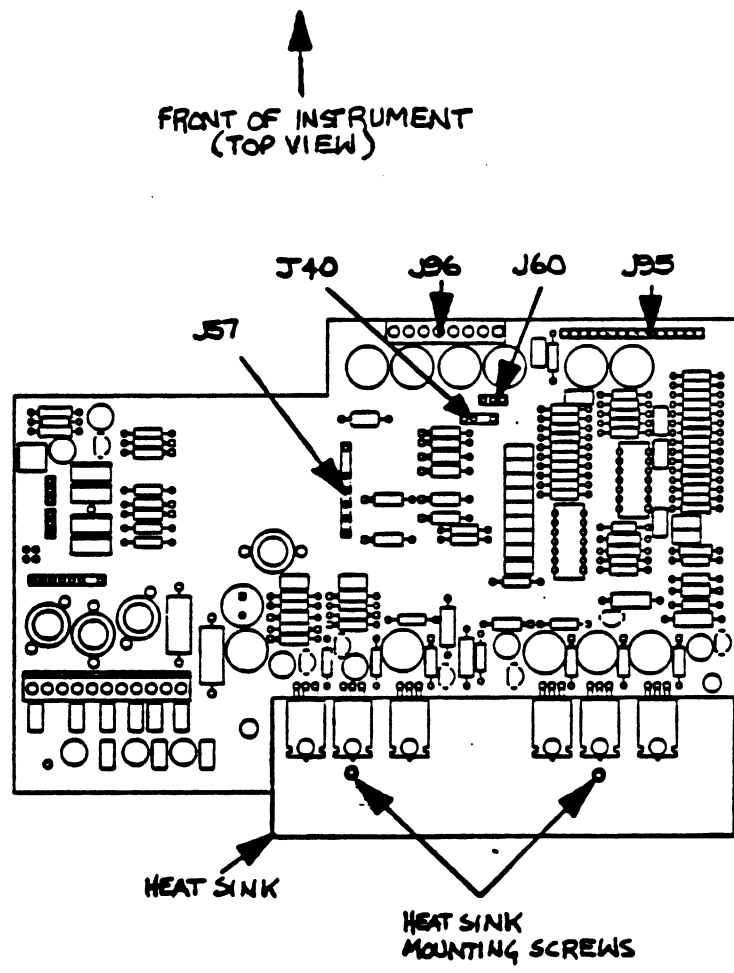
Connector and screw locations for the removal of the A4 Regulator Board.
